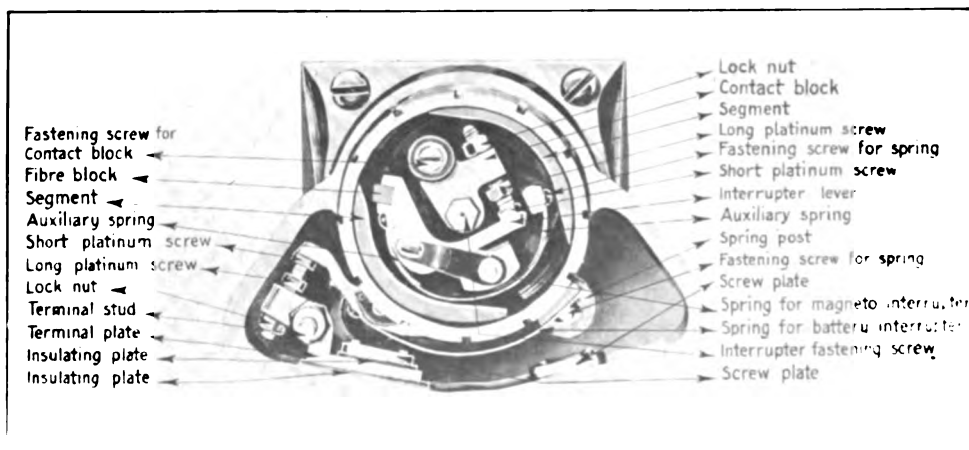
Dual Contact Breaker of Bosch ZR4 Magneto with Components Lettered.
